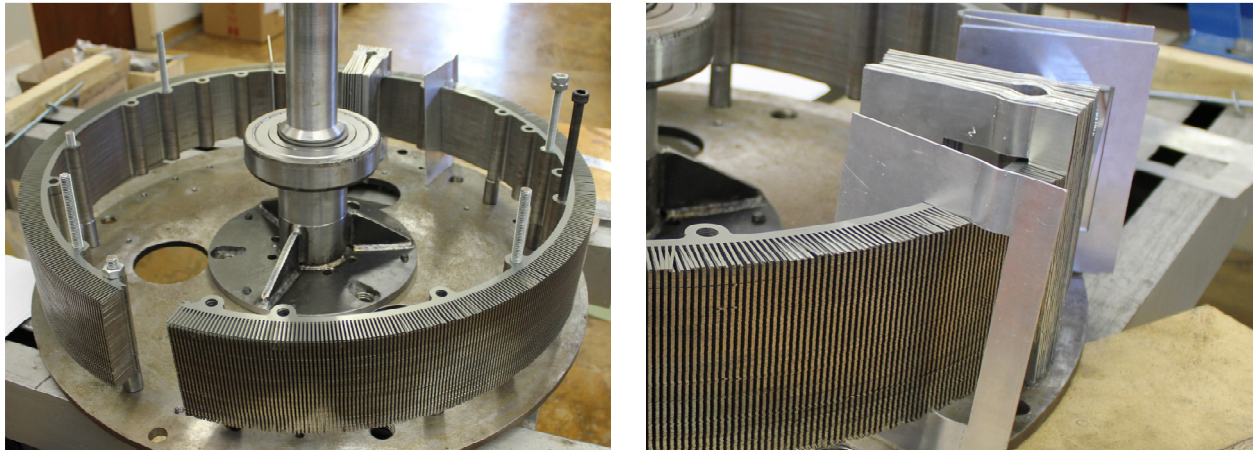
Manufacturing of the brushless-DC slip-PMG with (a) indicating the central opening and (b) indicating how the aluminium solid bar-coils are fixed into position.
